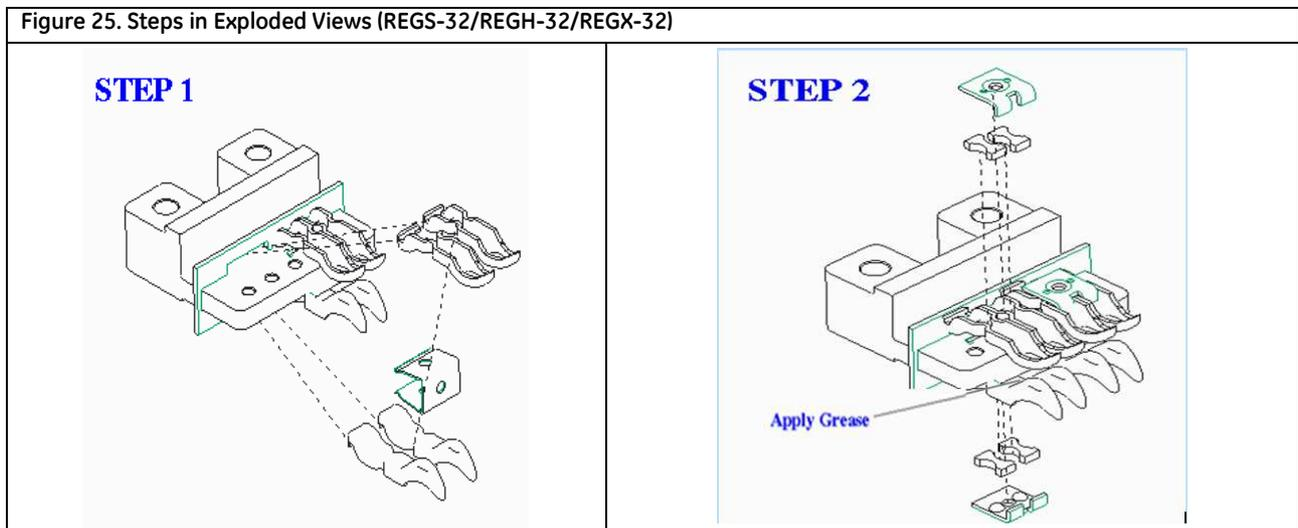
Steps in Exploded Views (REGS-32/REGH-32/REGX-32)
